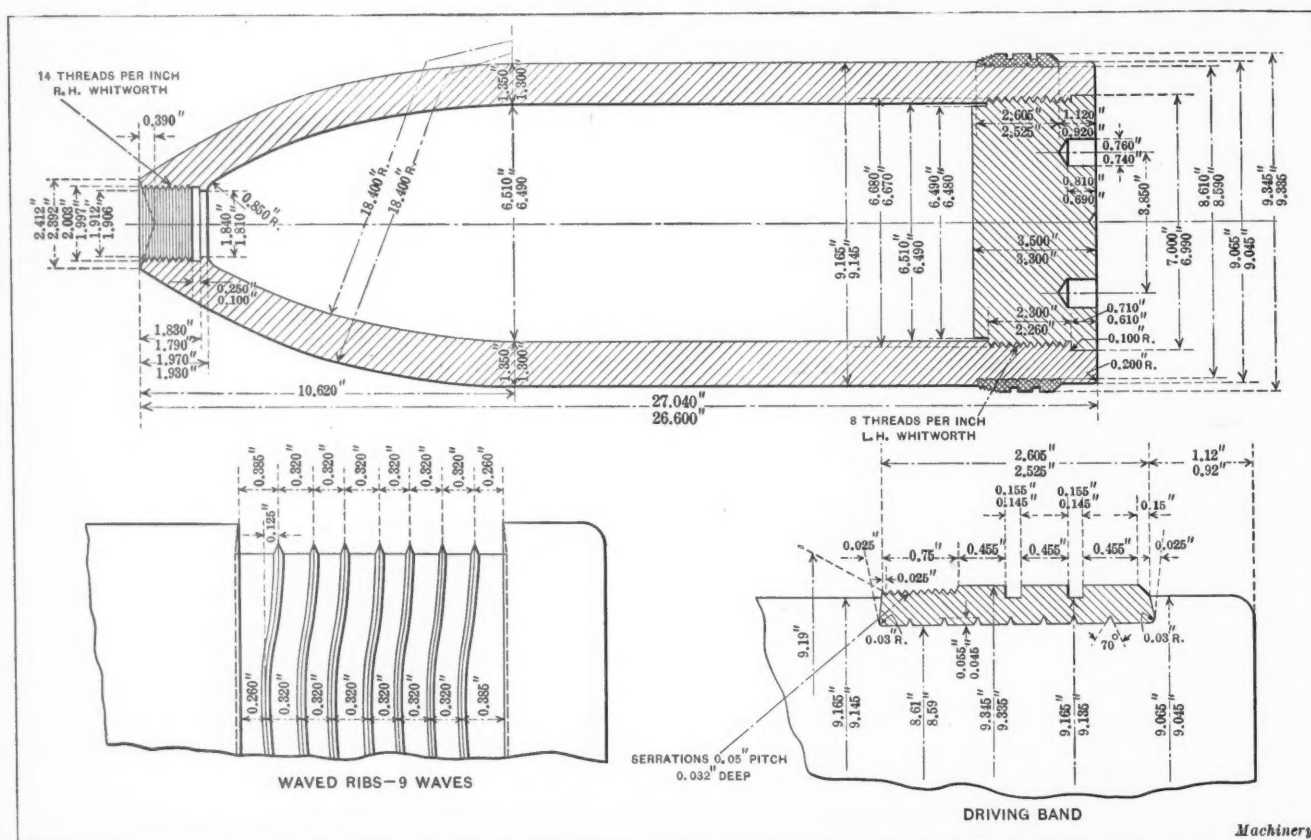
Sectional View of 9.2-inch High-explosive Howitzer Shell and Enlarged Details of Driving Band Groove and Driving Band
